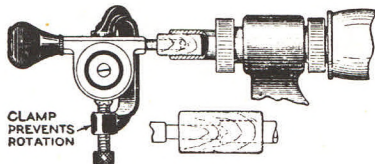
REVOLUTION COUNTER PLUGGED IN REAR END OF LATHE SPINDLE
